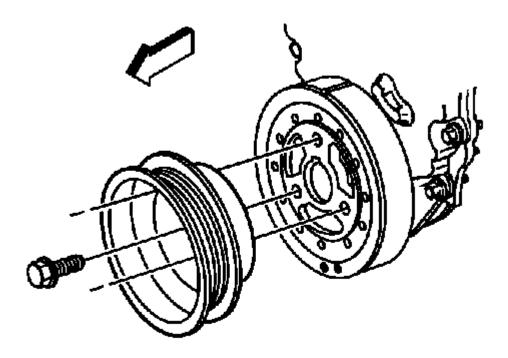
View Of Crankshaft Pulley & Bolts Courtesy of GENERAL MOTORS CORP.
